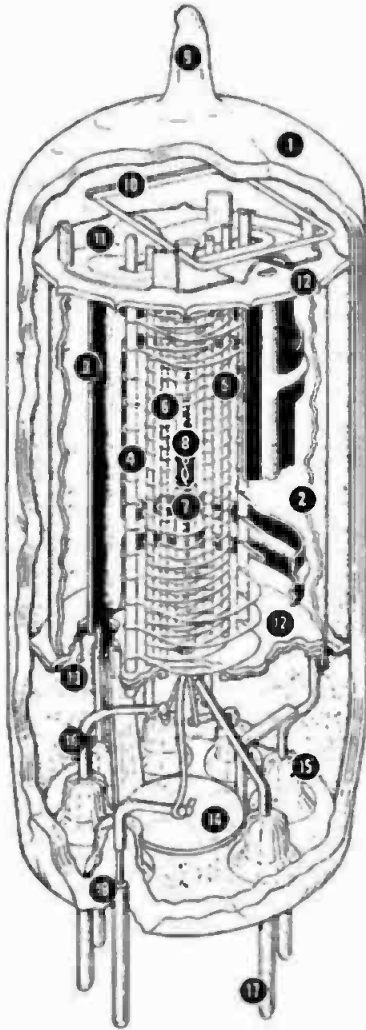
Materials used in the construction of a vacuum tube. (Courtesy, Radio Corporation of America)
